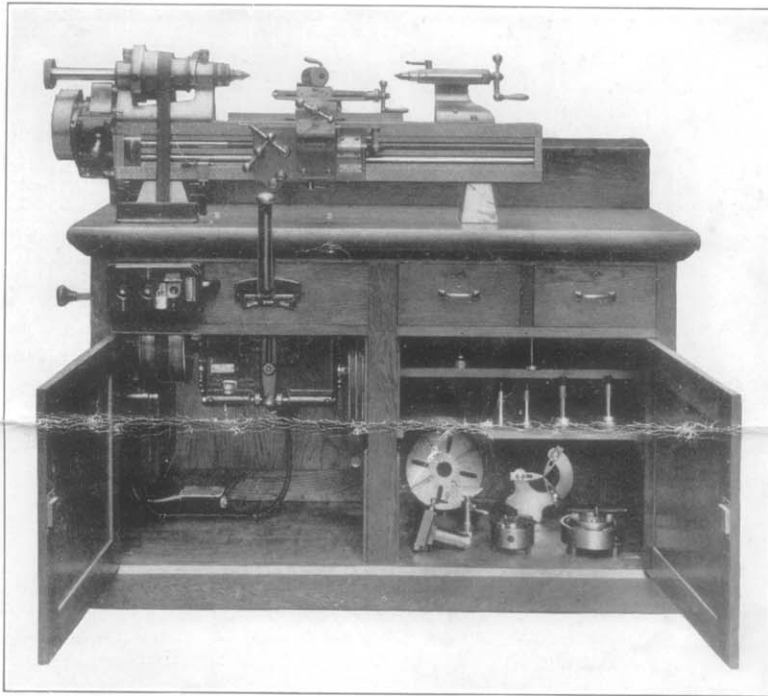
Rivett 608 back-geared screw cutting lathe on cabinet with Speed Box Motor Drive, hand lever control
